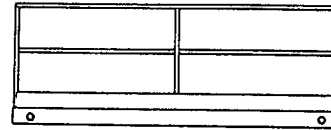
MOLDED PLATFORM CONSOLE
